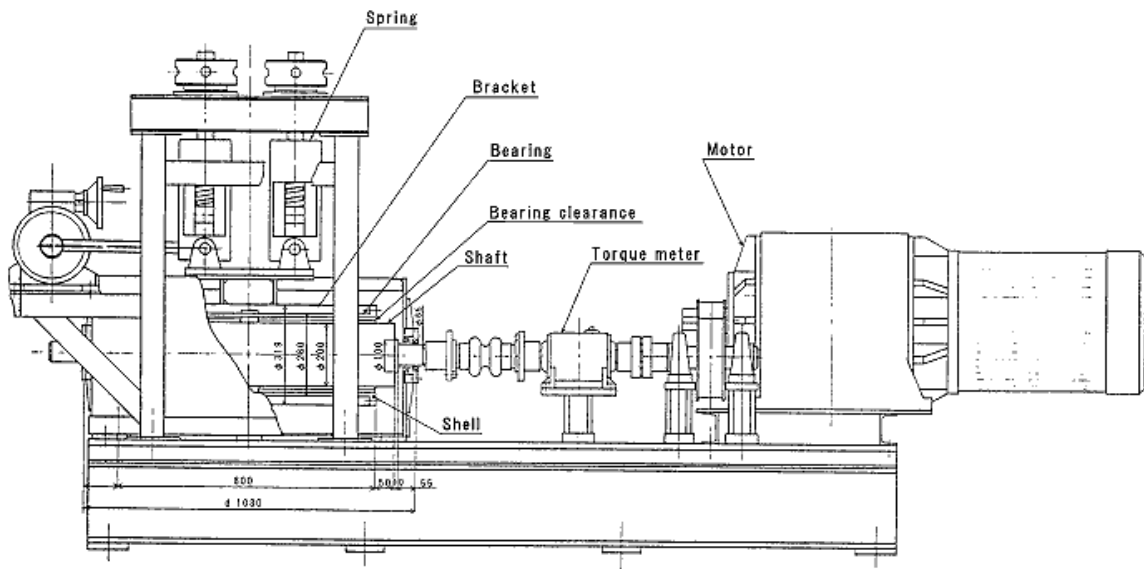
Abrasion test equipment (Shaft dia. – 200mm)
